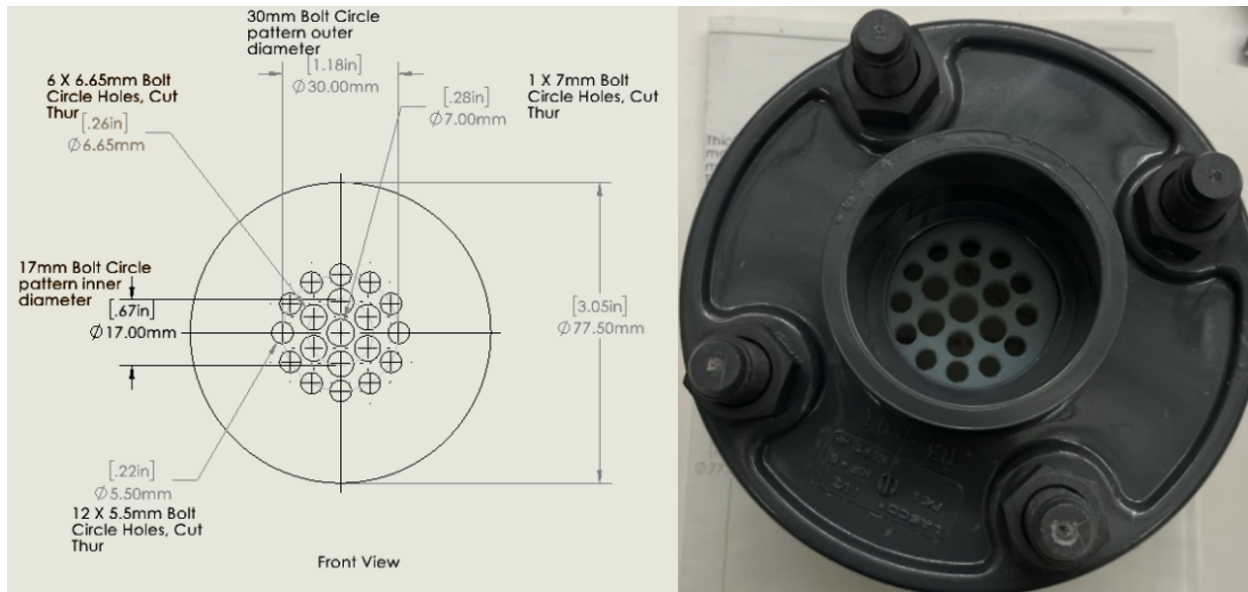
Flow straightener schematic designed by Houston et al [144] (Left), with flow straightener mounted between flanges (Right).
